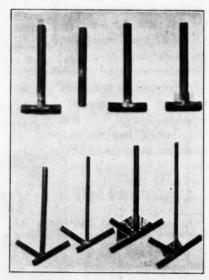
Types of Welded Joints Being Tested by the Bureau of Standards
